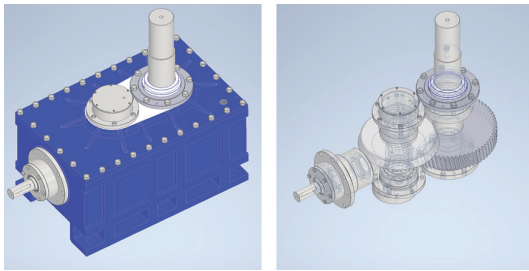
Design of the reducer outside and inside with spiral bevel gear and gear set
